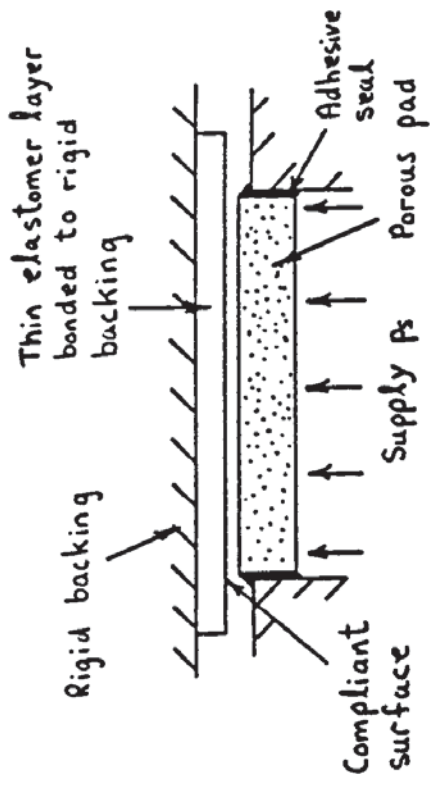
Porous and compliant aerostatic thrust bearing; compliant surface extending beyond porous pad
